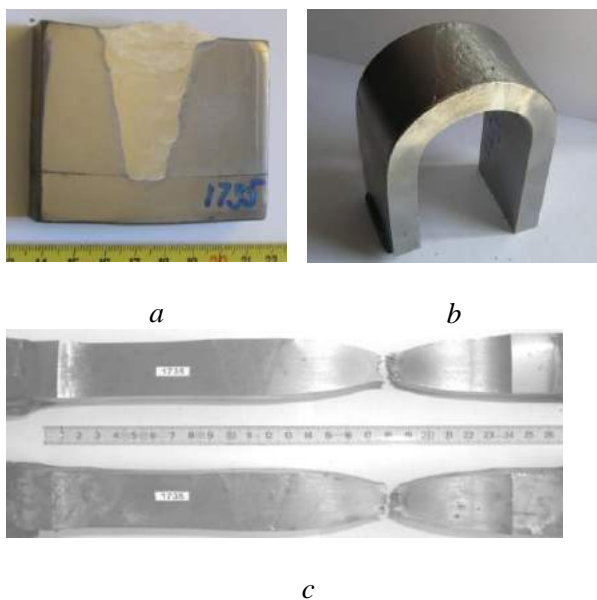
Macrosections (a) and appearance of the samples after the bend (b) and tensile (c) tests of the 40 mm thick welding joints of low alloyed high strength steel
